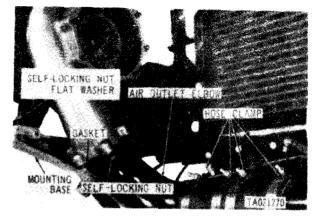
Removing or installing tubosupercharger air outlet elbow.
